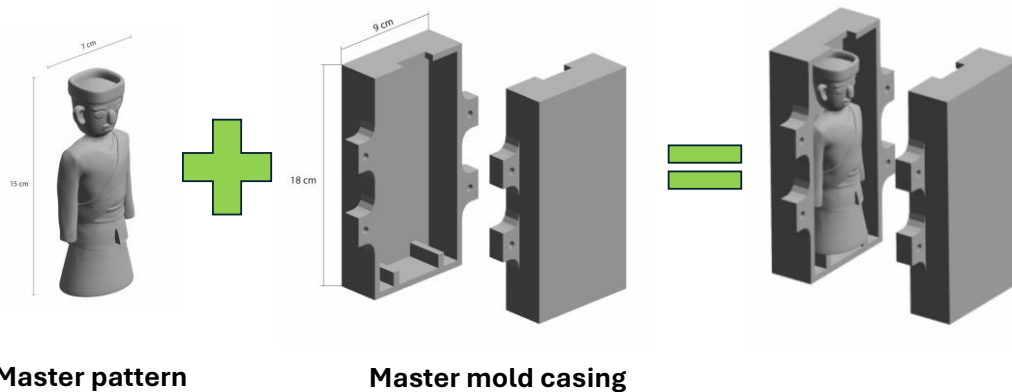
A set of master pattern and mold casing to produce ondel-ondel souvenir using 3D printing technique.
